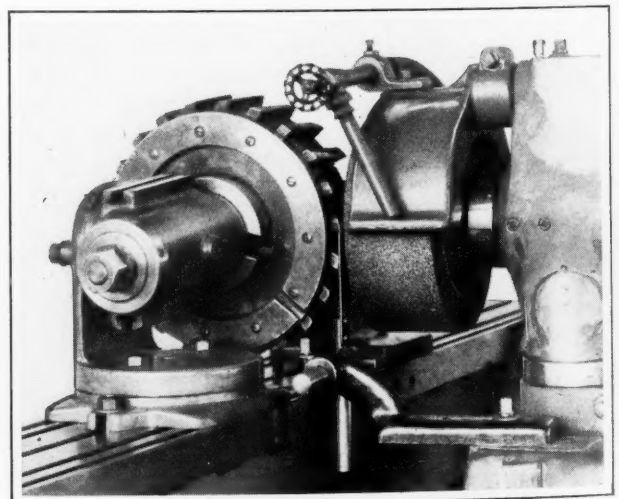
Thompson Cutter and Reamer Holder being Used in Grinding a Milling Cutter
